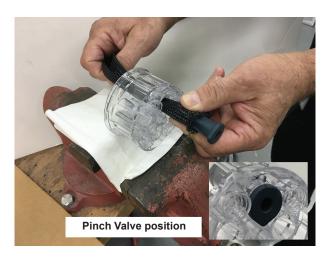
Inserting Pinch Valve into Insertion Tool
